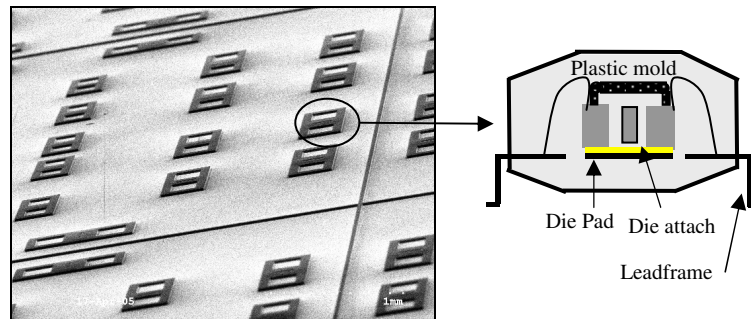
Packaged resonators in a die compatible with leadframe assembly [100].
